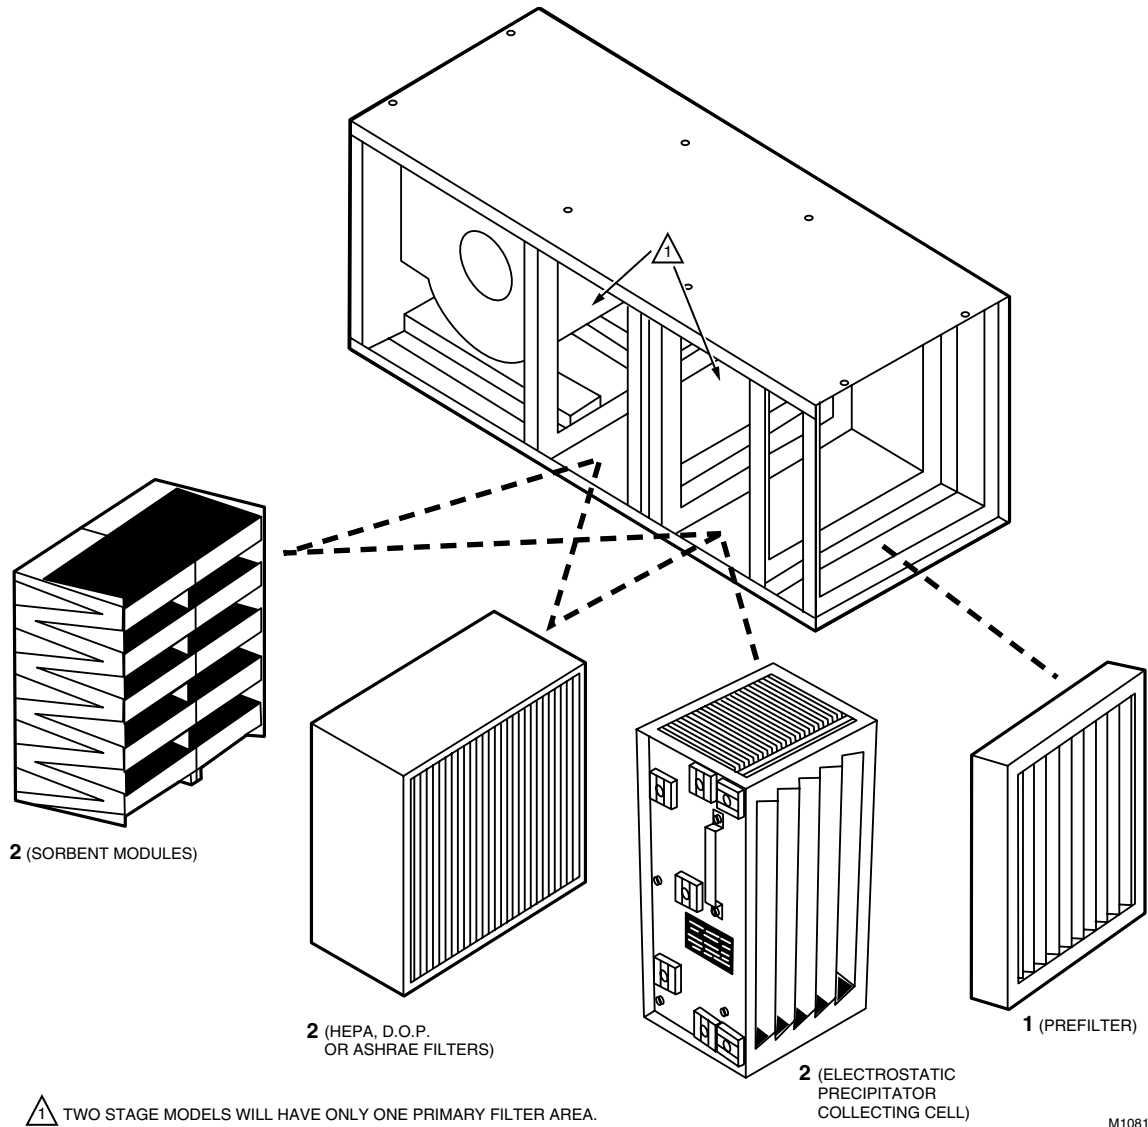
Exploded view of F116 (series 16000) self-contained ductable commercial air cleaner components.
